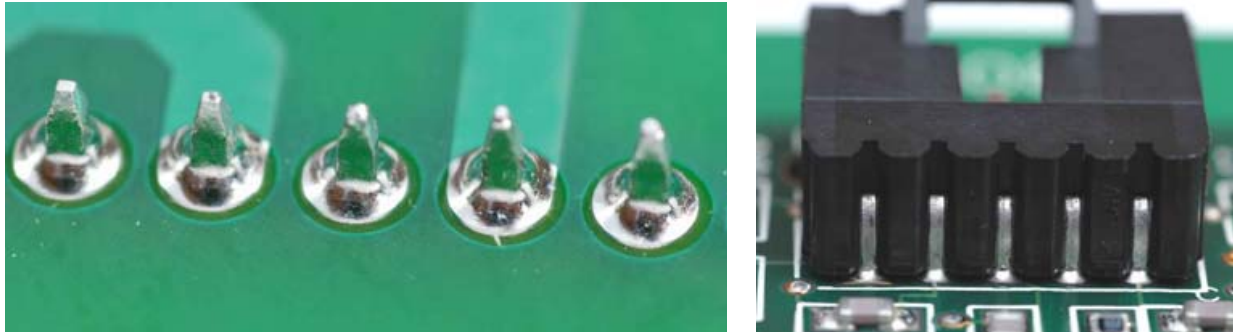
Component joints top and bottom, showing bright fillets and good hole-fill
